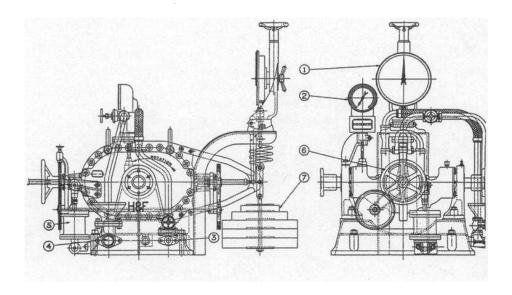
DPX hydraulic water brake arrangement. (Courtesy of Froude Hoffman)
